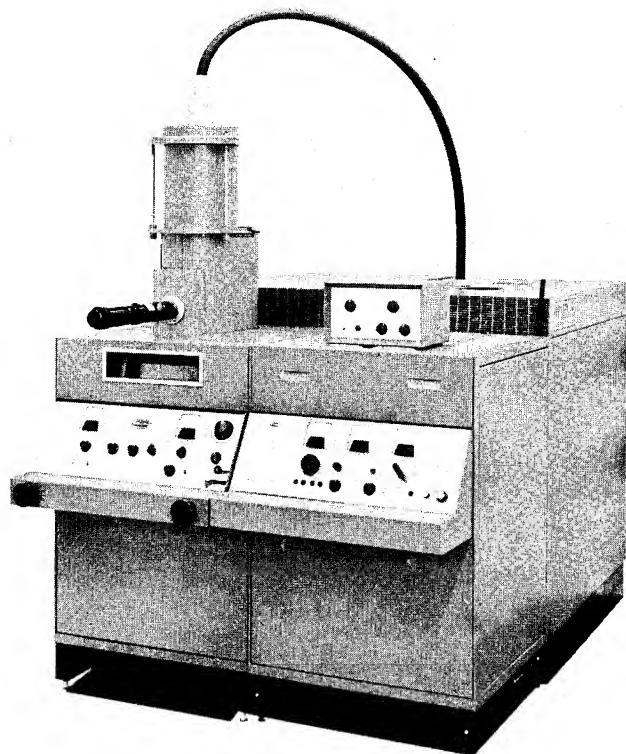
Hamilton-Zeiss electron beam welding machine.
